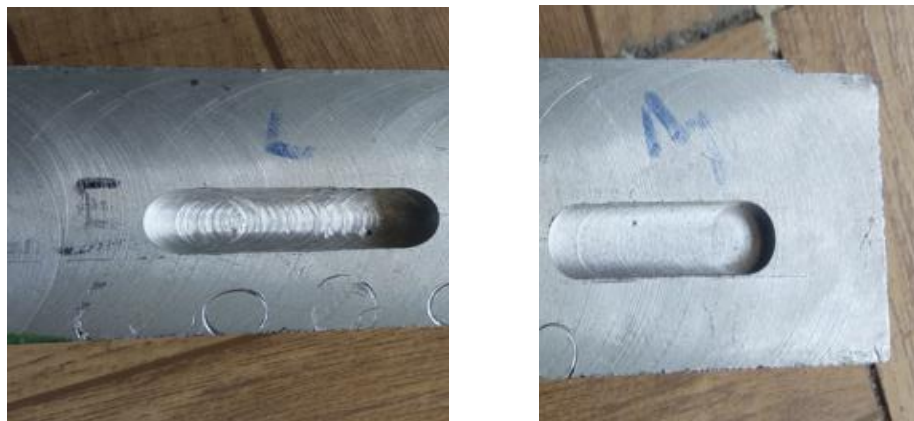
Keyway end milling of Aluminum bar by fixture and milling machine
